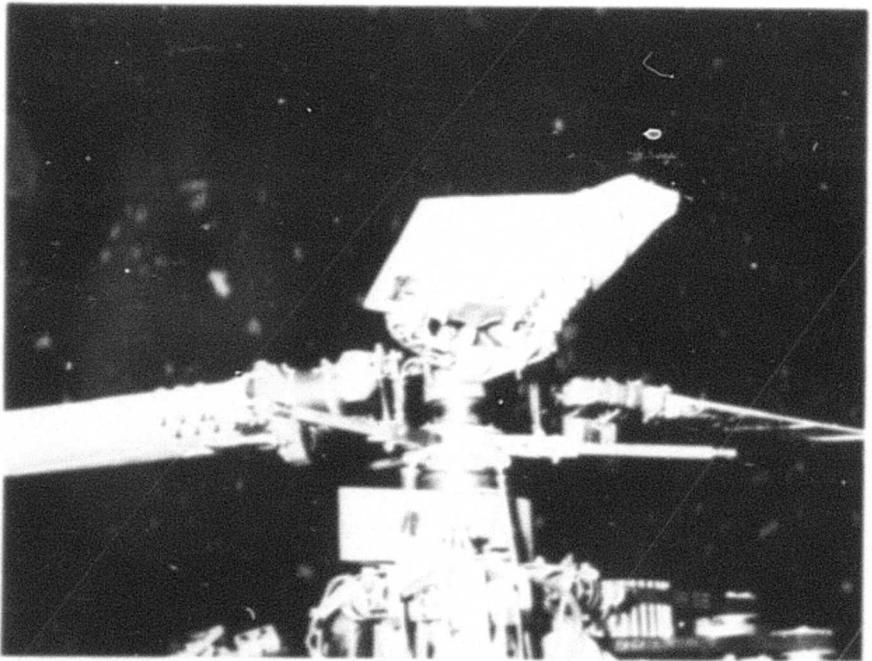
ROTOR DAMAGE, FIBERGLASS BLADE FAILURE
